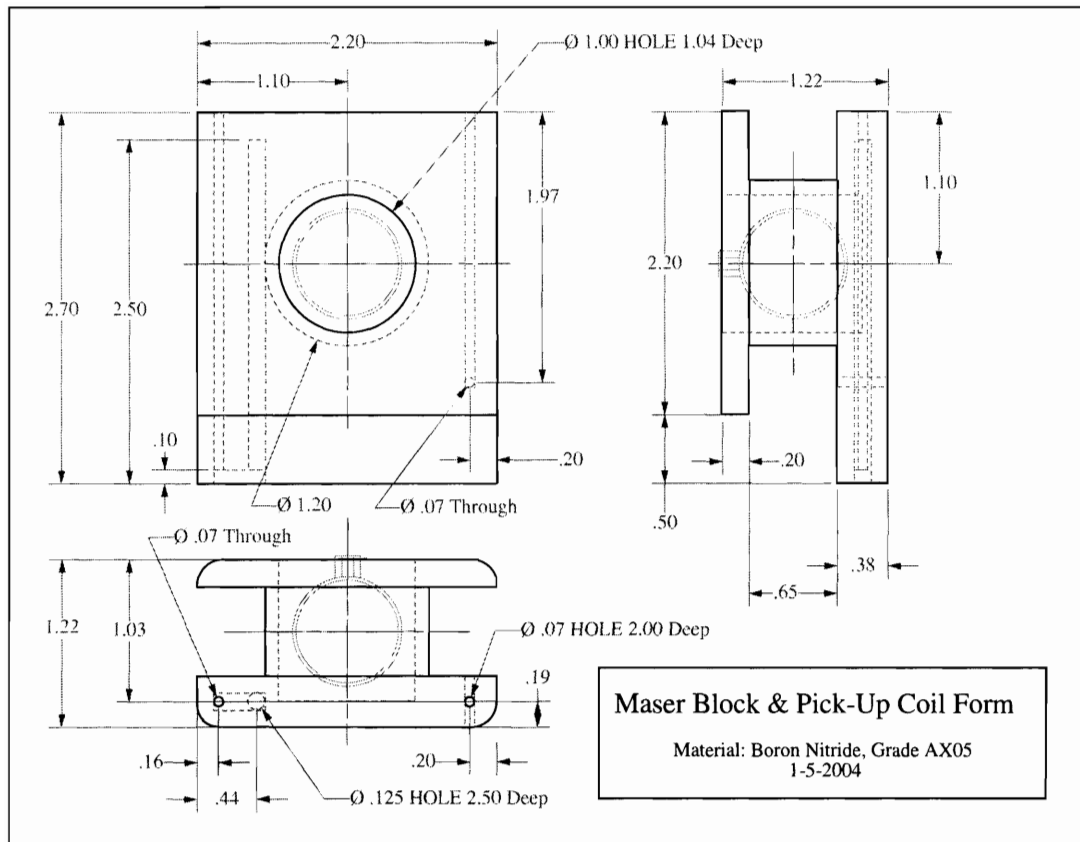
Machine drawing of the maser block. All dimensions are in inches.
